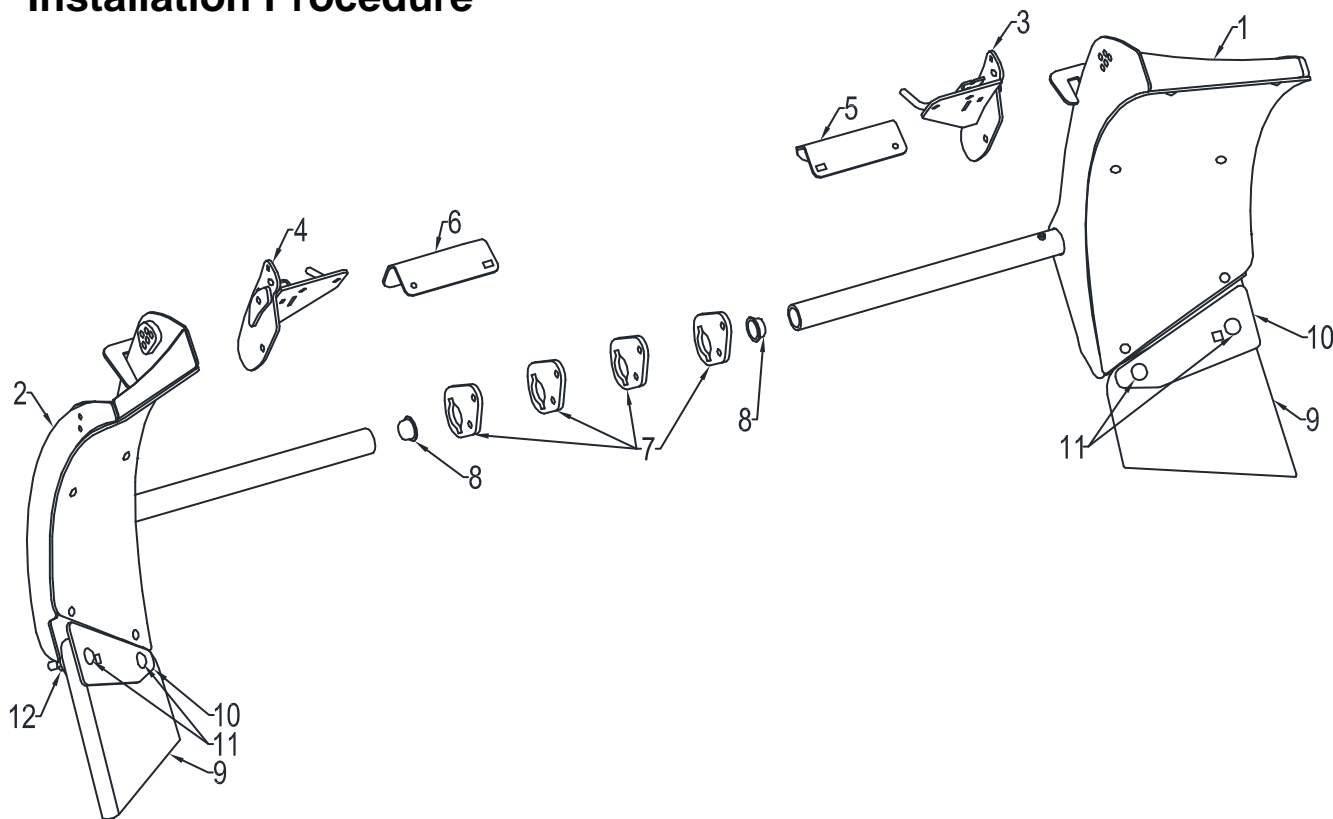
V-XT & DXT Wing Extension Parts G10572
